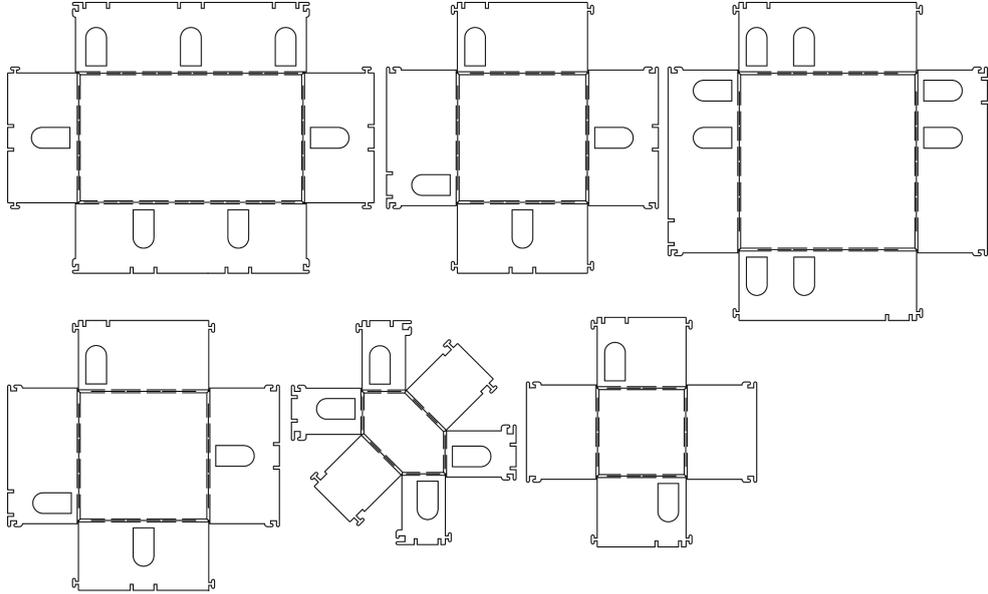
Connector rooms, cutout patterns. The rooms correspond to those of figure Figure 5.34.
